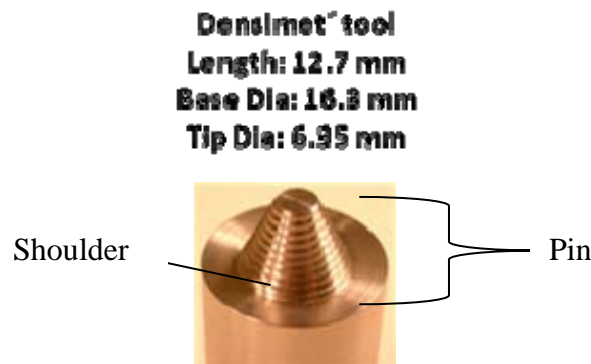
Friction Stir Processing Tool Used to Process Nickel Aluminum Bronze.
